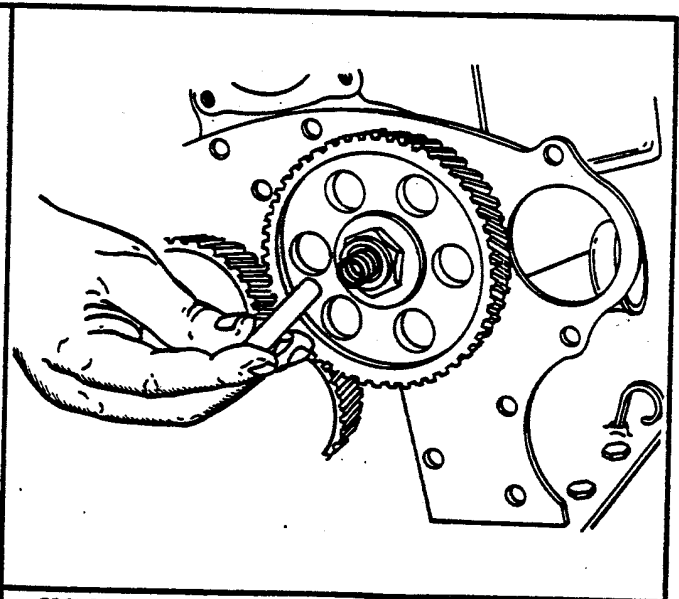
CAMSHAFT END PLAY (SPRING LOADED)
